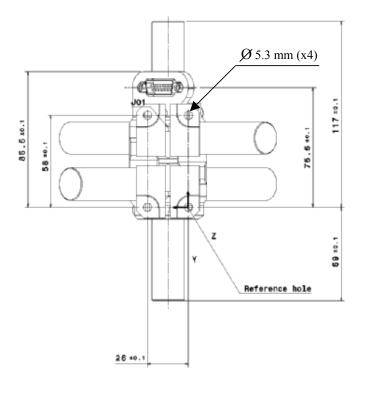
SCM-PA Interface drawing Dimensions in mm
